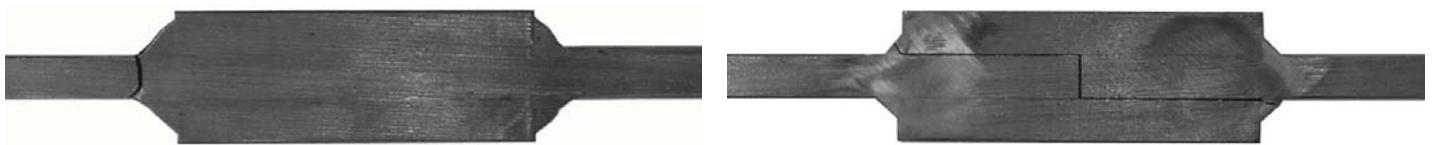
Investigated doubler plate specimen (left) and lap joint (right) with fatigue cracks at upper left weld
